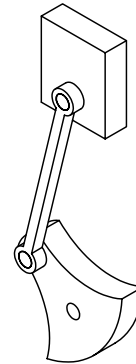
Reciprocating mechanism after converting the blocks into parts
